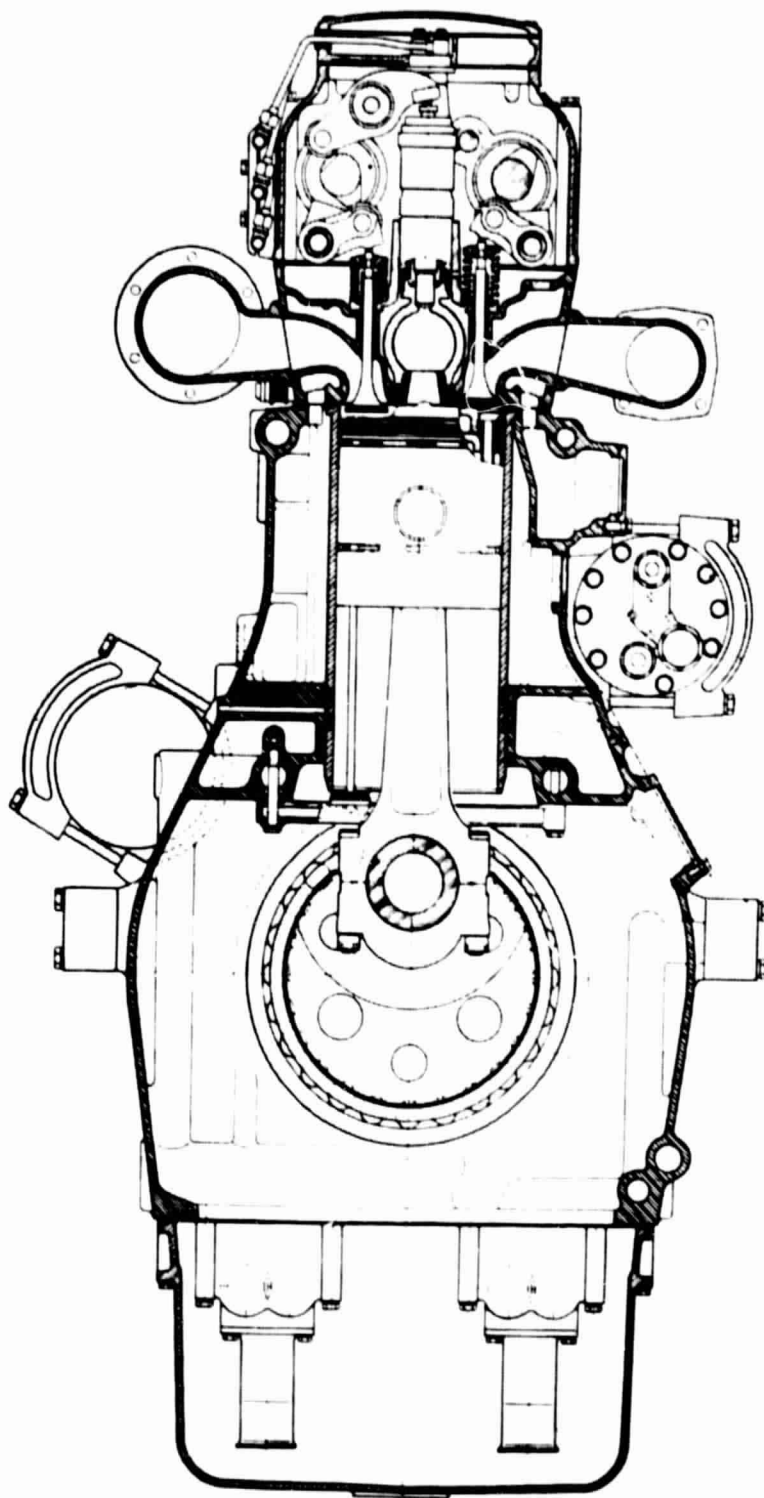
Maybach Type MD-320 Diesel Engine (Ref. 56)
